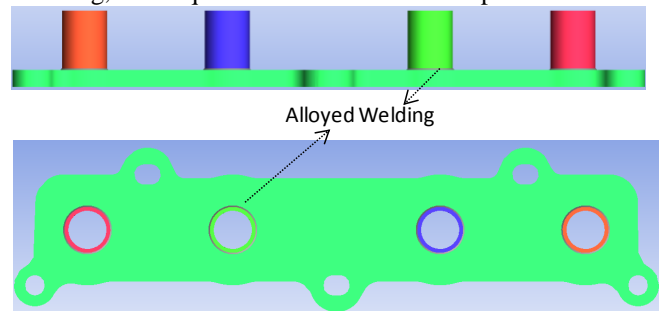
Conventional Exhaust Manifold Assembly with Welding In the Root
